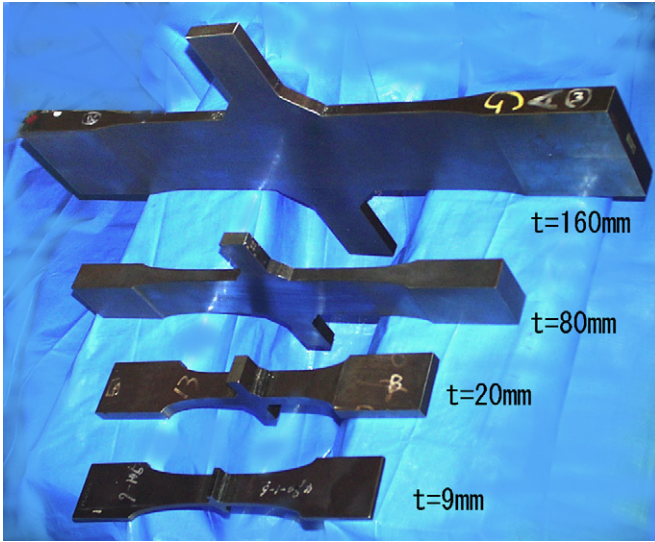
Specimens of non-load-carrying cruciform-welded joints. t is the plate thickness.
